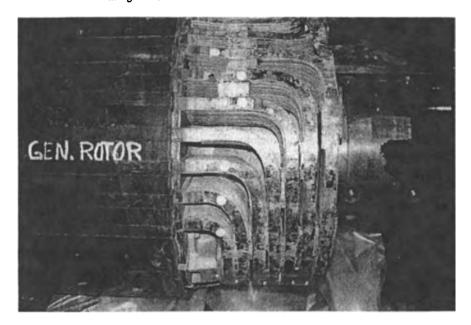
[R11] Top view of the same end-winding shown in Figure 5-16. The blocking between coils has been removed. As seen in the picture, there are seven coils per pole in this example.
